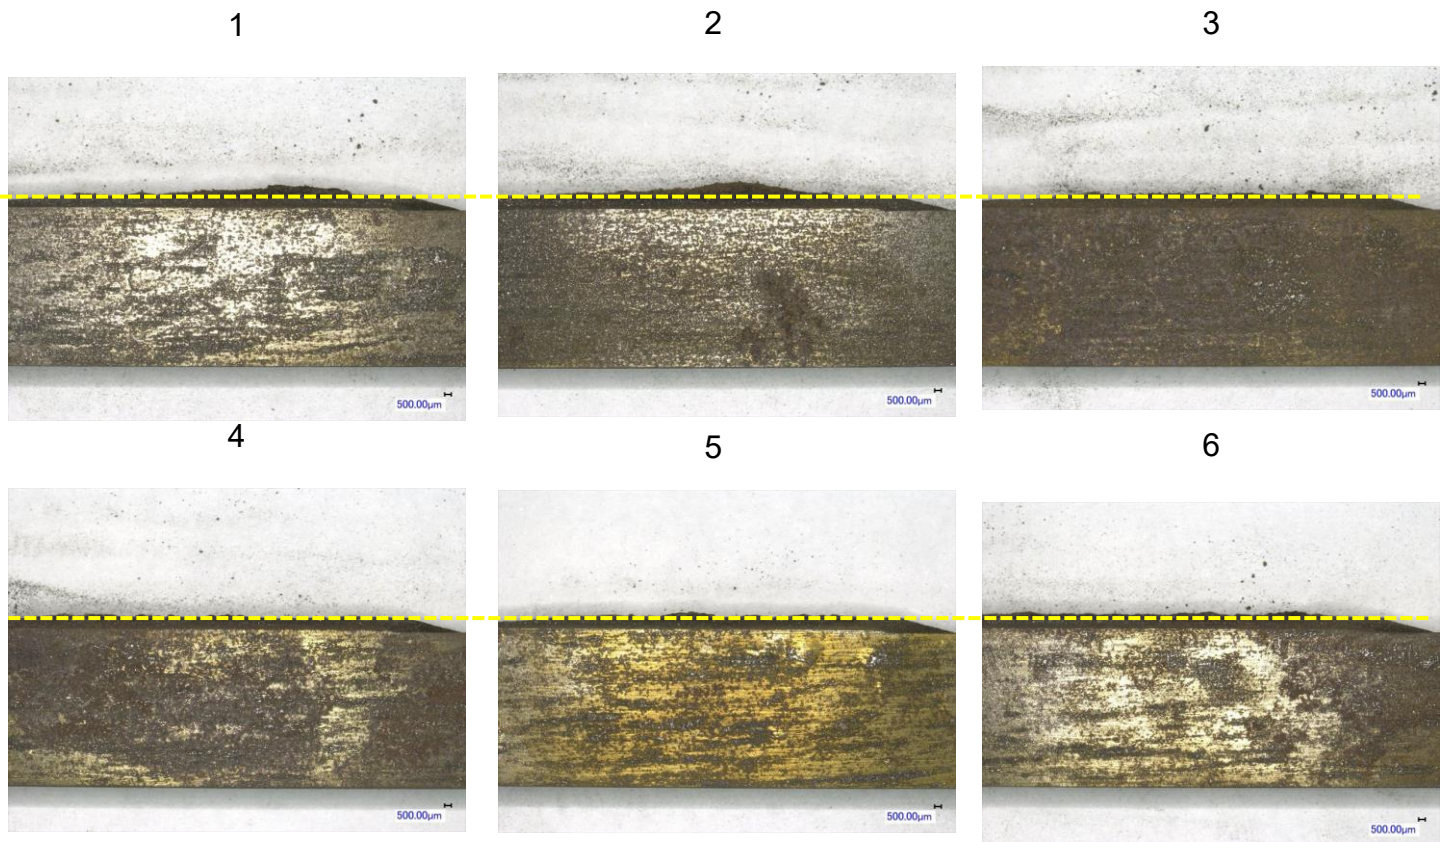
Fracture surface of DCB specimens with the standard V shaped groove (Mark AT2)
